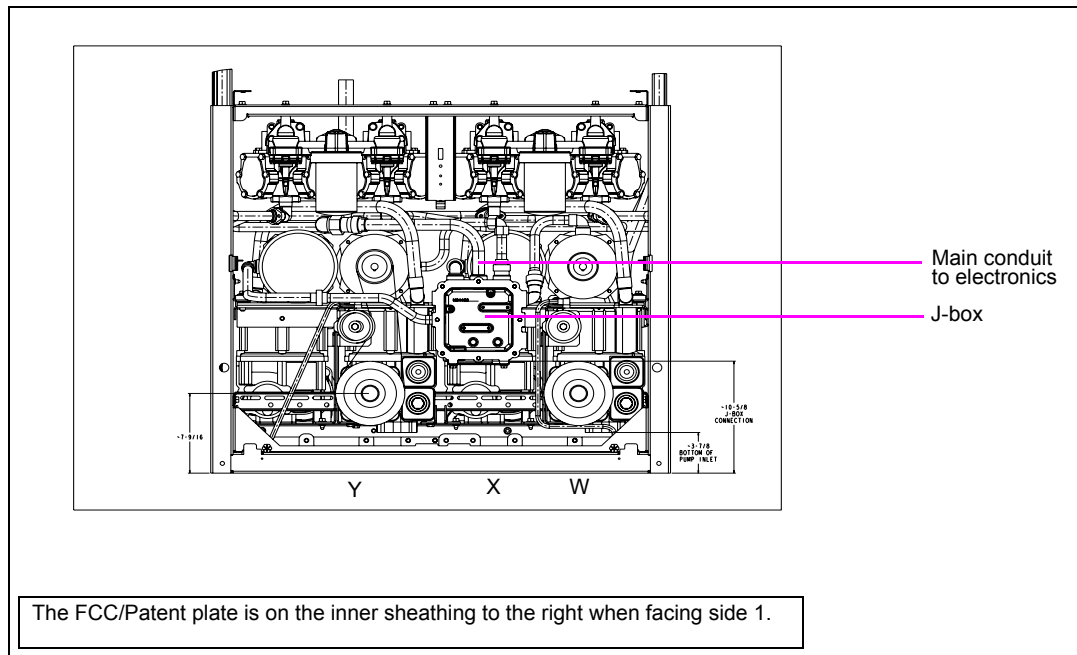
Encore Dispenser Blender Piping to Hose Fitting Layout
